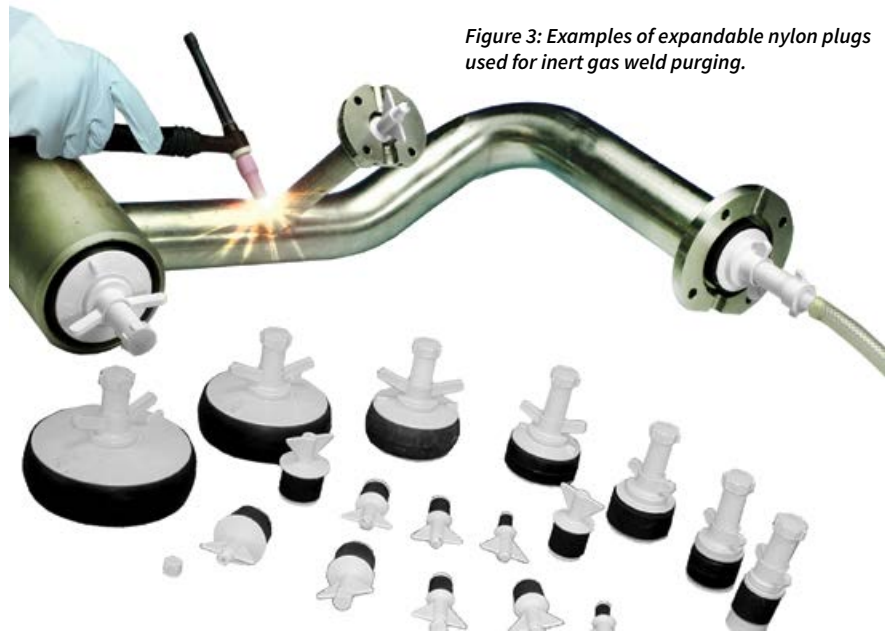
Examples of expandable nylon plugs used for inert gas weld purging.
